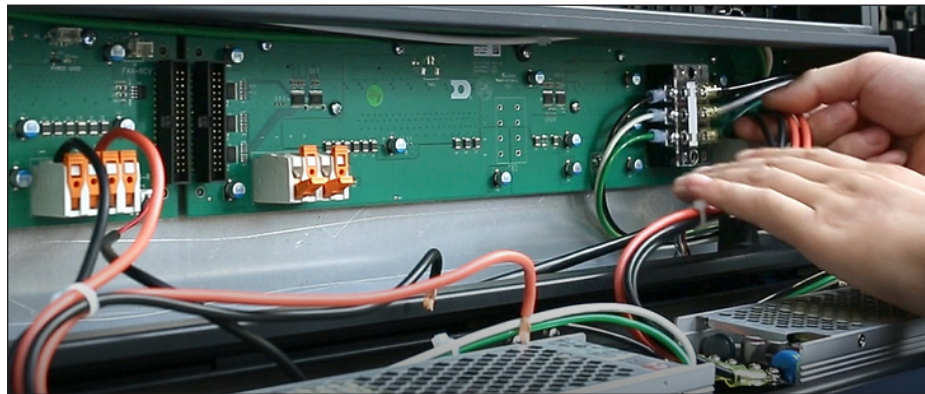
Remove Jumper Board Connecting Hub Boards Together
